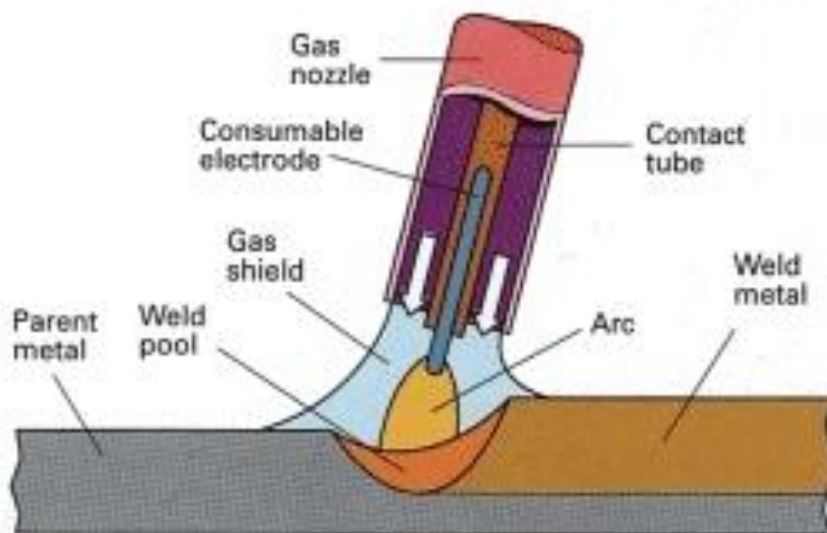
Schematic diagram of gas metal arc welding (GMAW)
